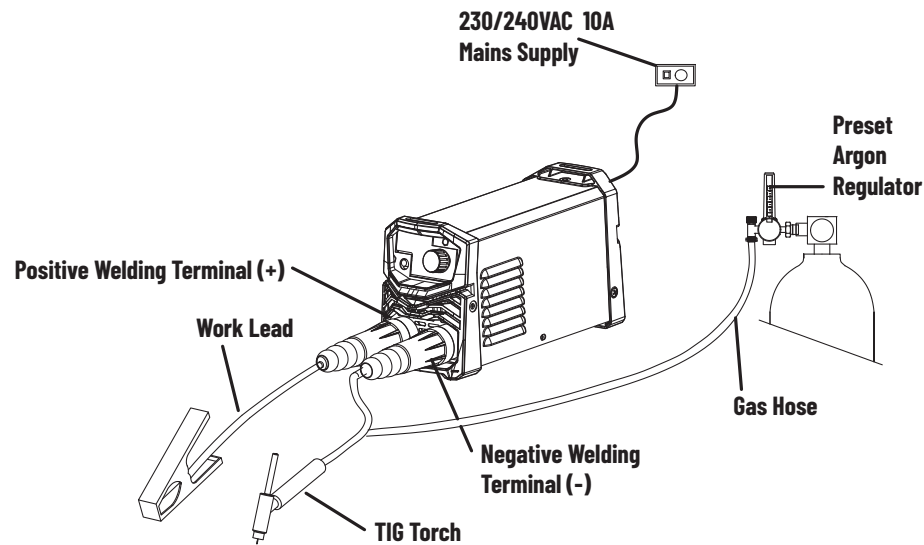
Setup for LIFT TIG (GTAW) Welding
